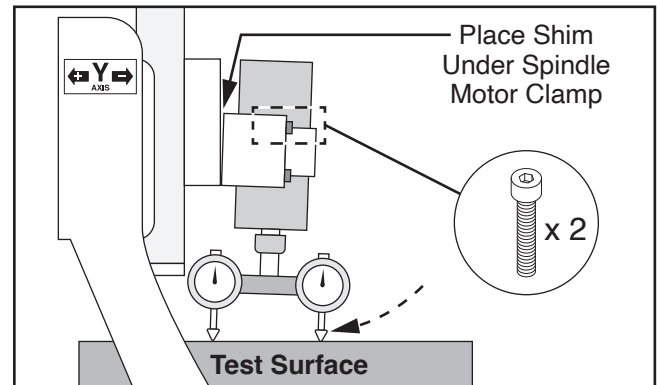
Example of shimming spindle motor clamp with upper cap screw set loosened.
